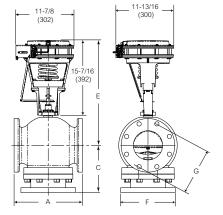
MK-6911 with Flanged 3-Way Globe Valves^a
